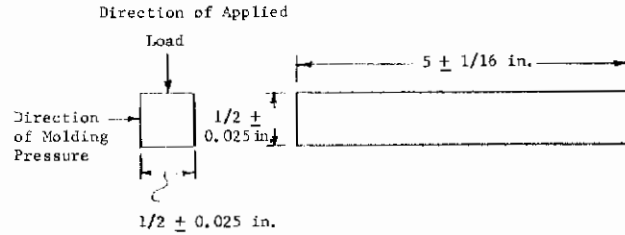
HEAT DISTORTION SPECIMEN
